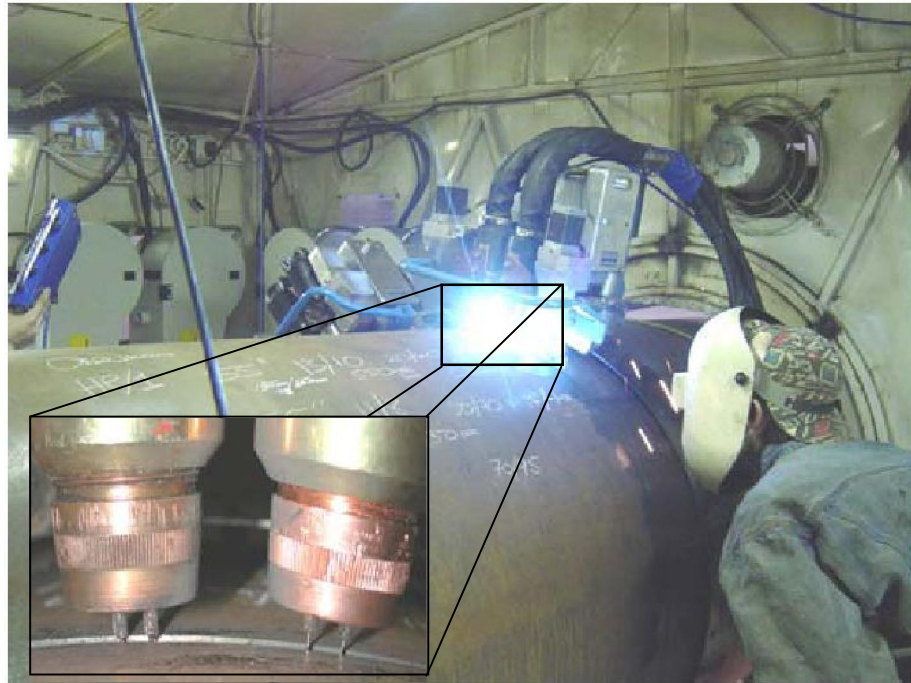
Arrangement of Cranfield automated pipe welding torches and system [16, 55]
